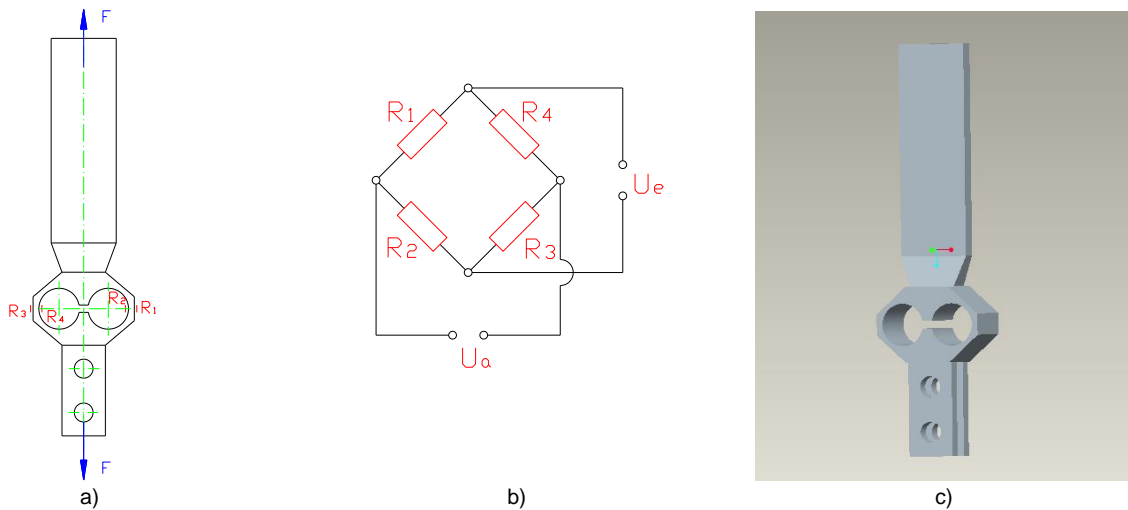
Scheme of tensometric rings for forces measurement from connection bars of parallelogram between sowing section and furrow [1]:
